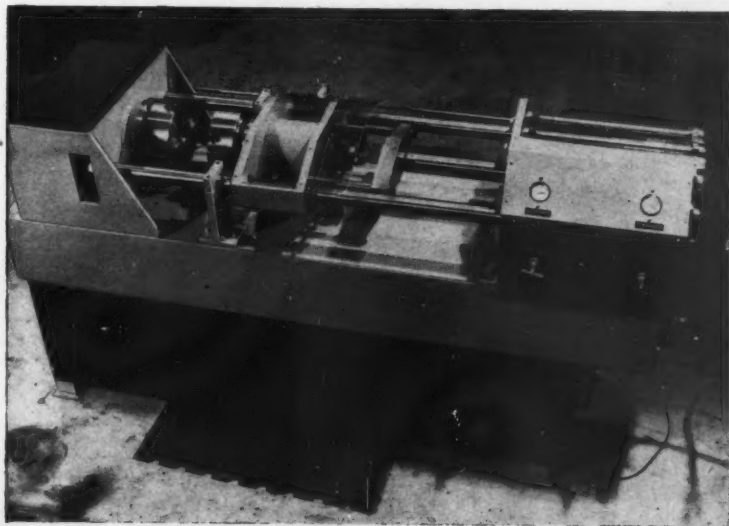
This friction welding machine has recently been built by the British Welding Research Association
